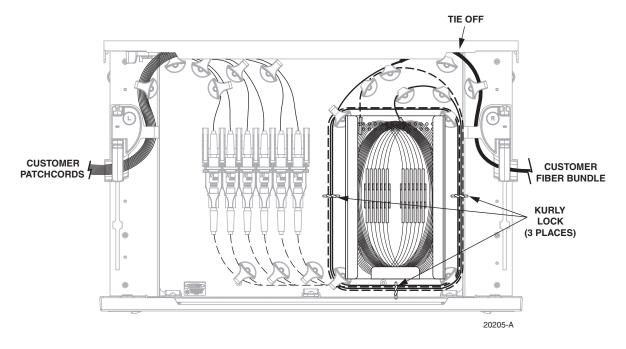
Completed Cable Routing for 12-Position Termination and Splice Tray
